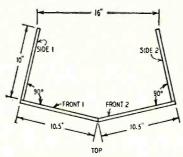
Front view of speaker cabinet. Insulator is normally used on door bottoms. Remove felt strip and attach.
